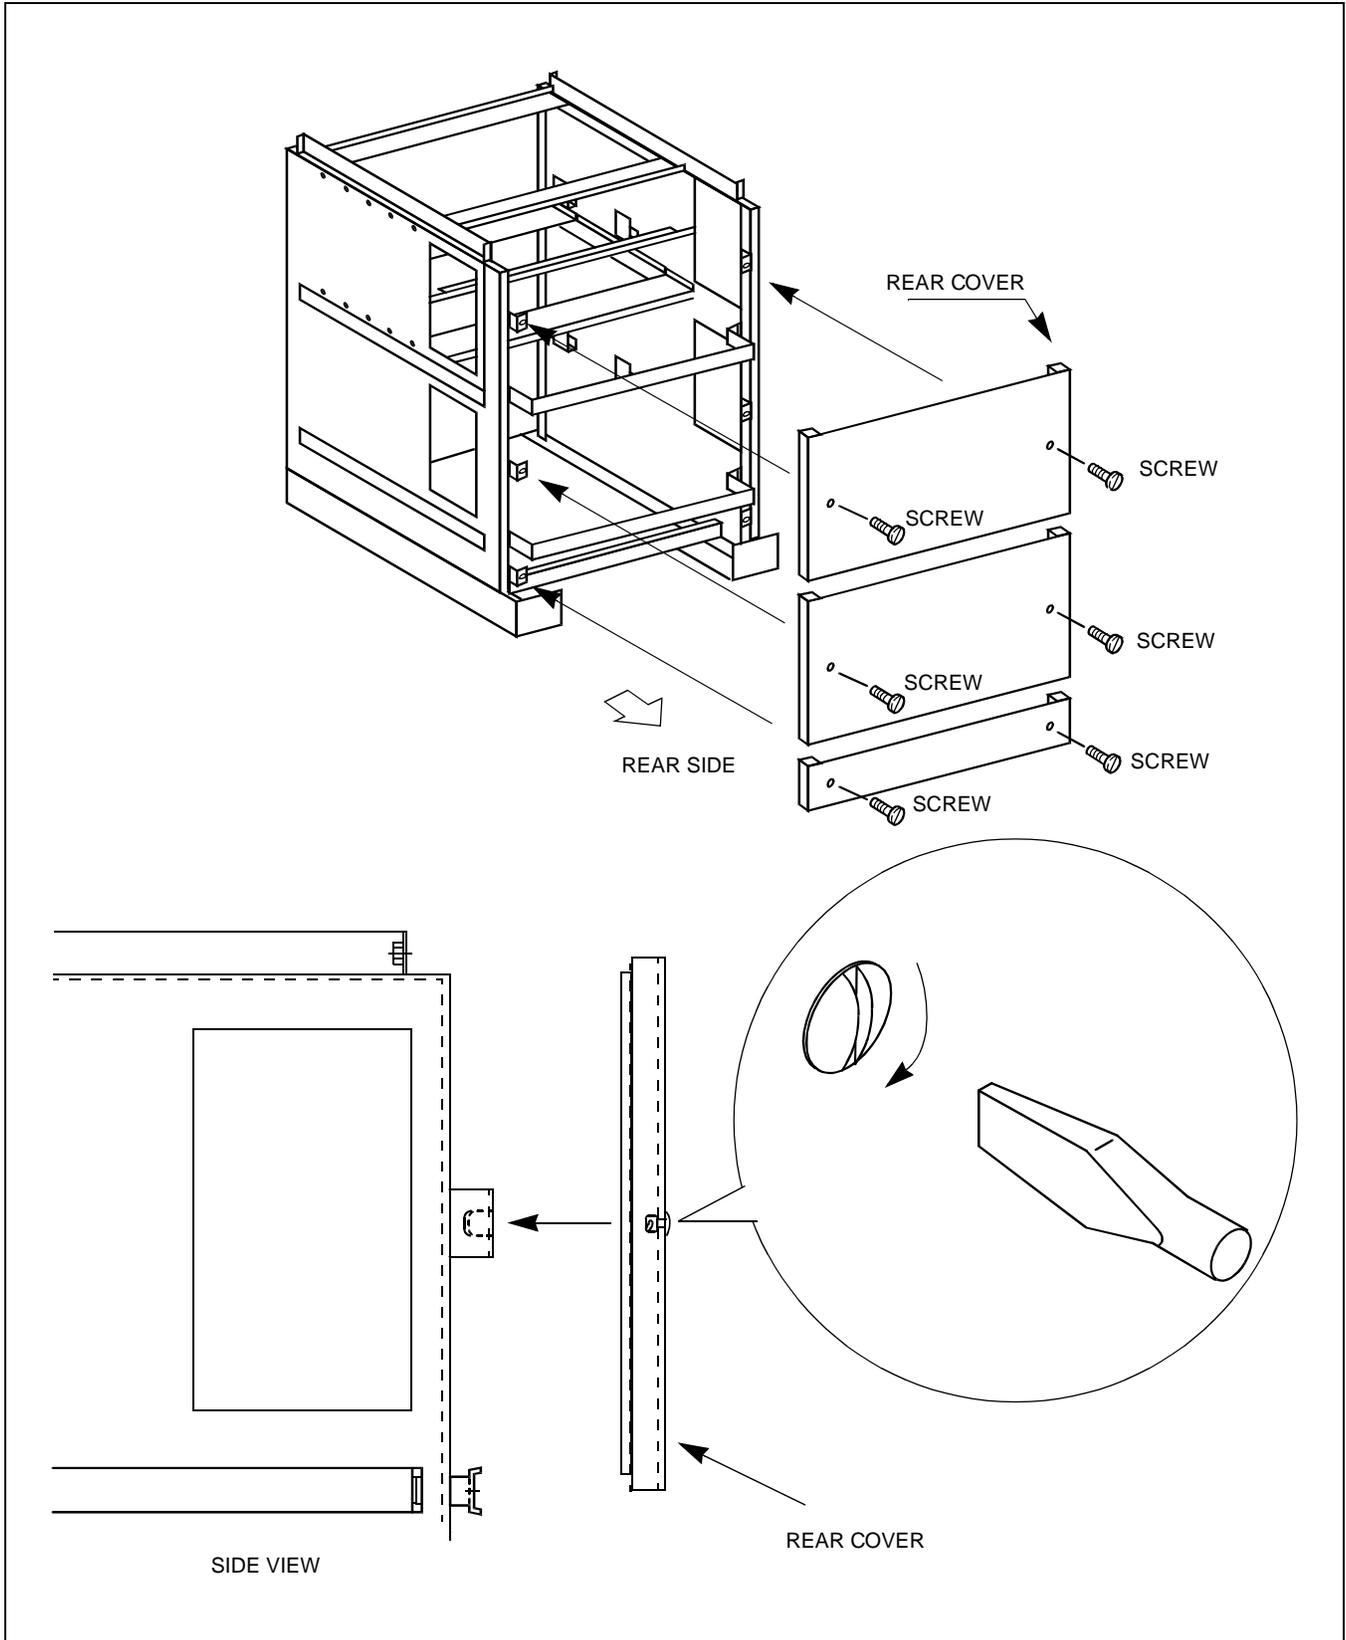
Rear Cover Mounting Method (BASEU+LPM+PIM0)
